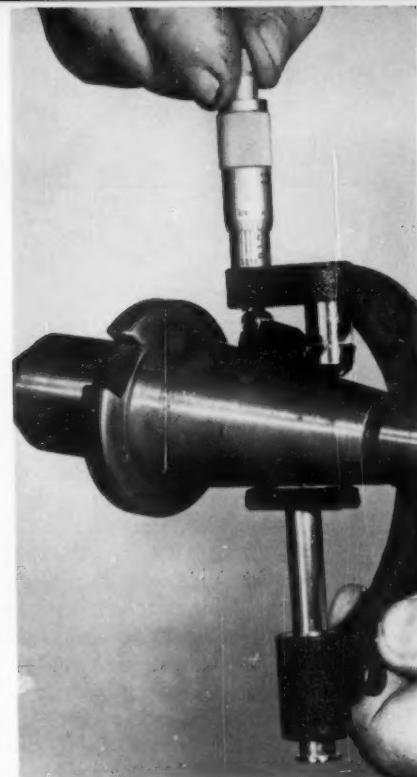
Direct measurement of taper is made possible by incorporating a sine bar in a micrometer. This speeds inspection.
